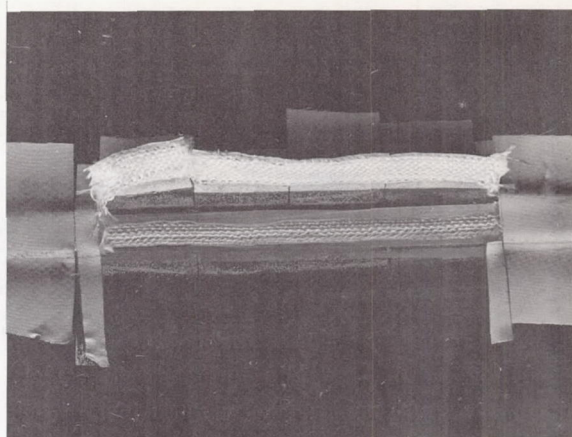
Pressure sensitive refractory tape used as weld backup for smooth, uniform welds.
